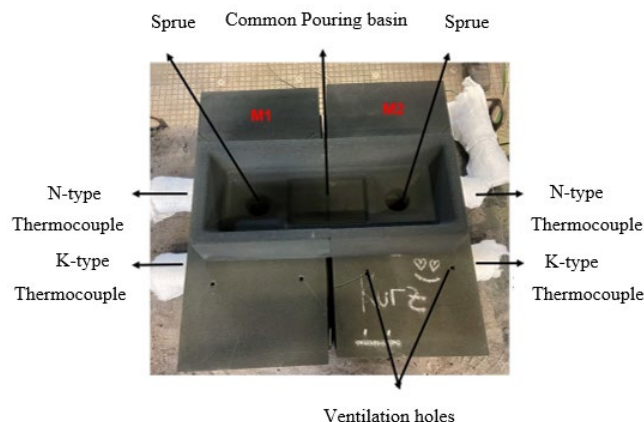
Arrangement of mold 1 (M1) and mold 2 (M2) with common pouring basin and different thermocouple attachments to monitor cooling conditions
